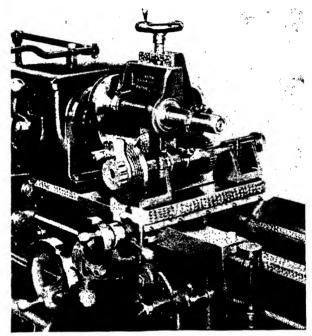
Globe gear-cutting attachment used on an engine lathe.
